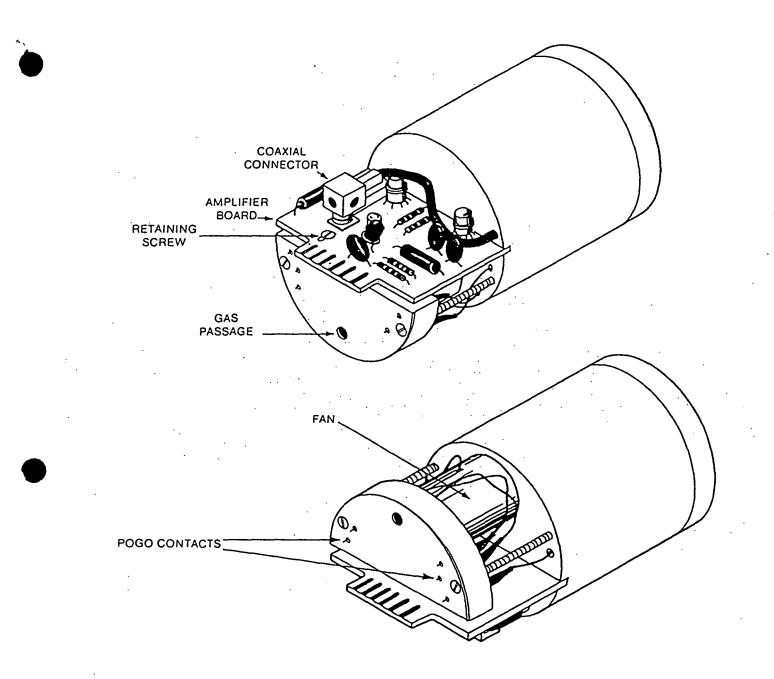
LAMP HOUSING ASSEMBLY
